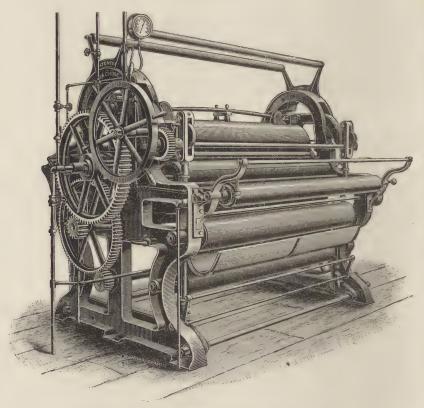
Woonsocket Machine Press Co.'s Miller Press.
